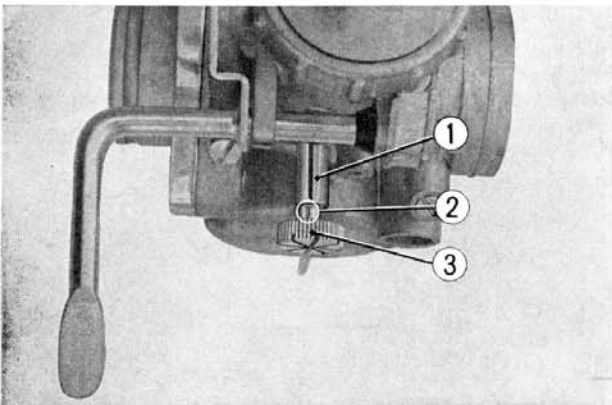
① Index mark ③ Throttle stop screw
